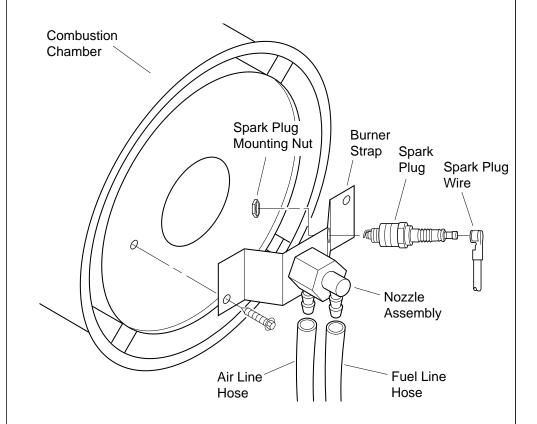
Spark Plug Removal, 30,000 BTU/Hr Model
